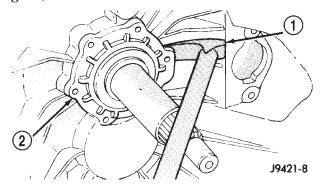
Loosening Bearing Retainer Sealer Bead—Typical
